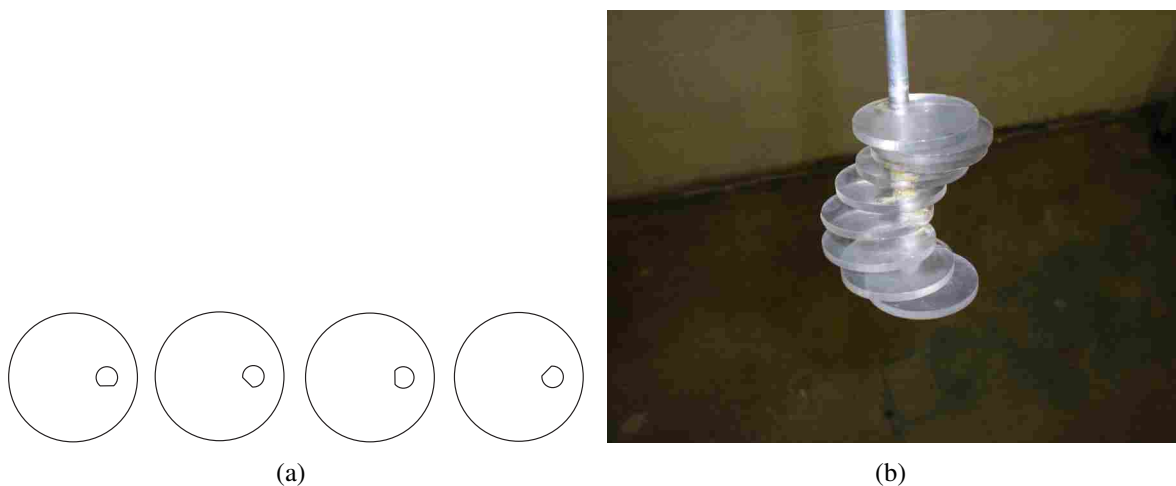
Four cam designs ready for the laser printer (a). A 45 degree rotation has been applied to each of the holes in the cams. The finish cams spiraling down the shaft (b).
